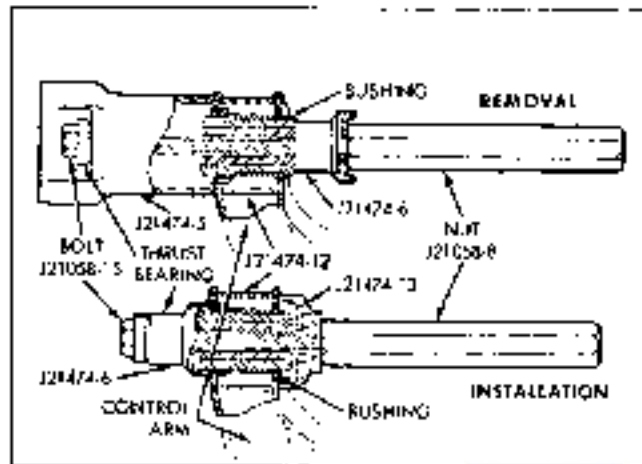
Lower Control Arm Rear Bushing (Firebird)
